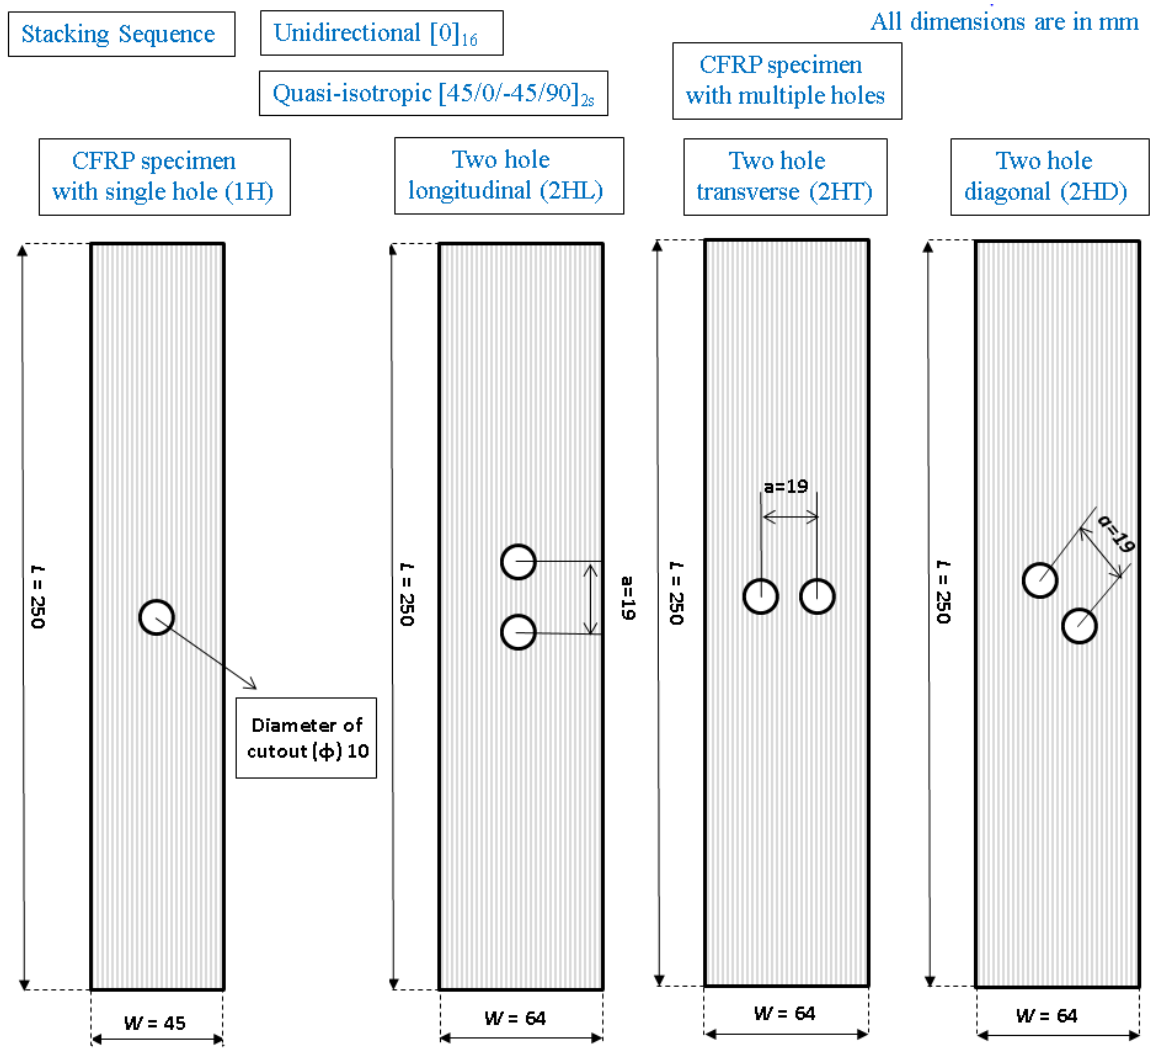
Specimen geometry of CFRP specimens with single and multiple cutouts
